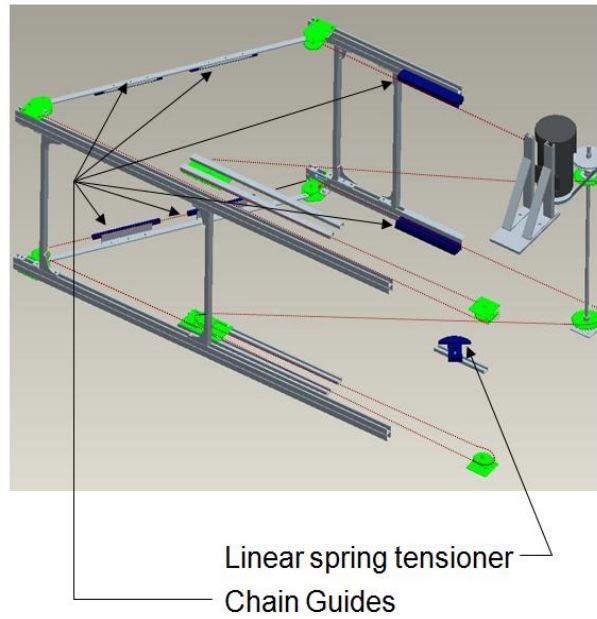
3D CAD drawing of wake generator structure with chain tensioner, sprockets, and chain guides highlighted.
